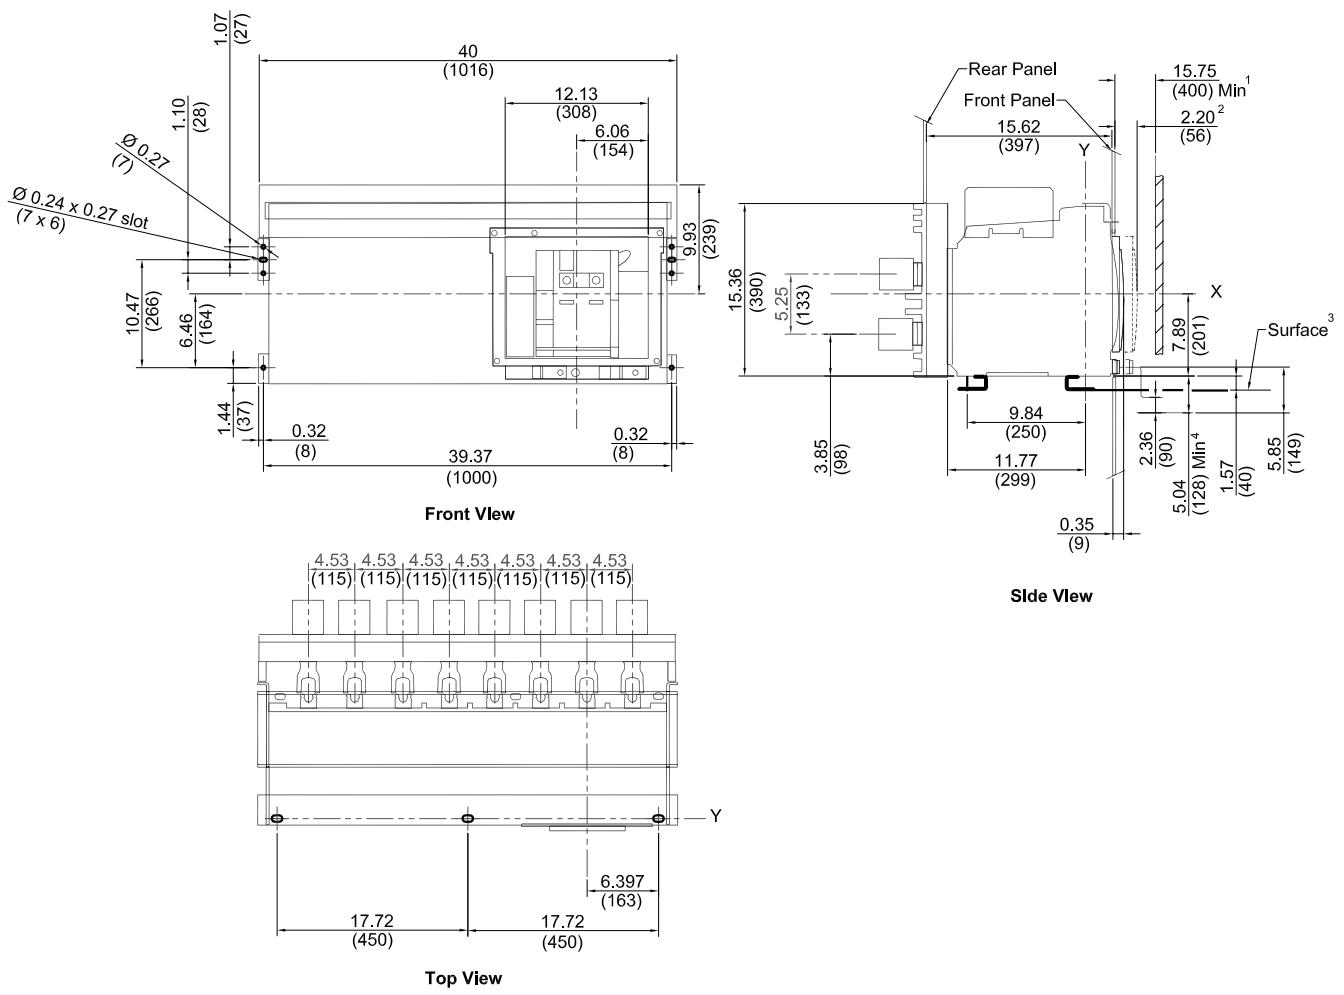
3200 A L1 and 4000–6000 A Master DrawingDimensions: in
